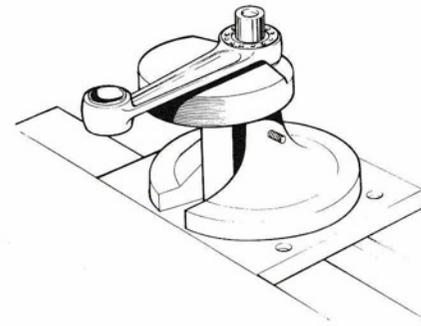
Crankcheek and crankpin showing connecting rod and thrust washers in position.
